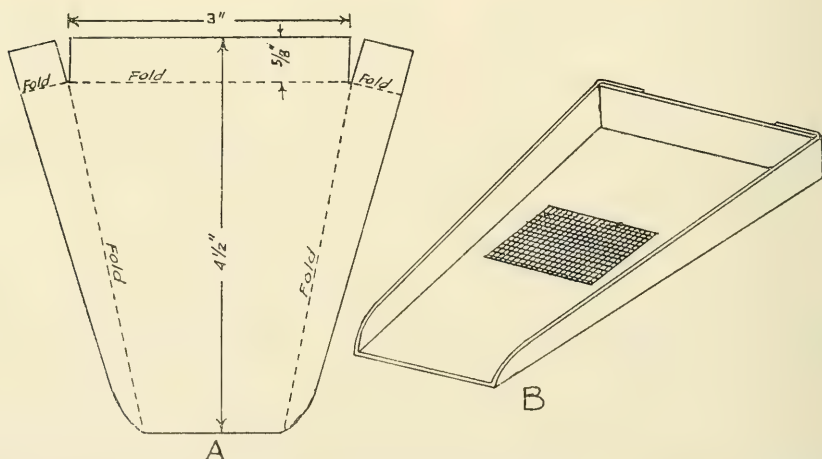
A*—Plan for cutting sheet-metal scoop tray for viewing samples under the microscope. The material, preferably aluminum, can be cut with tinners' shears. *B*—Completed tray with 0.5 millimeter grid for measuring sand grains.
